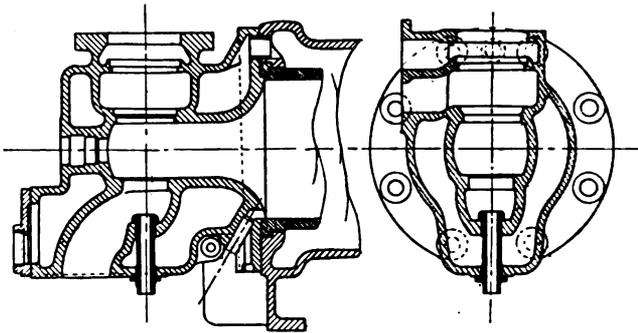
Longitudinal section. FIG. XII.—79. Transverse section.
